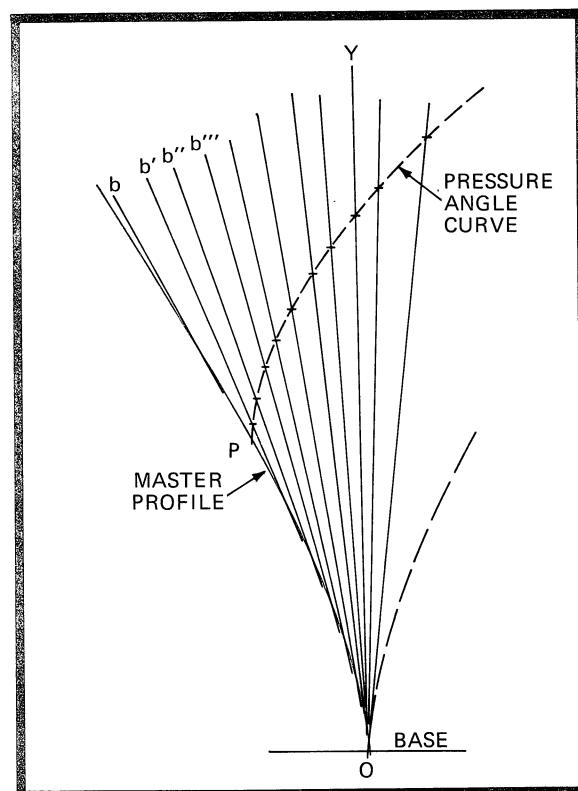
Control lines representing positions of straight side of hob in generation of gear tooth form.
